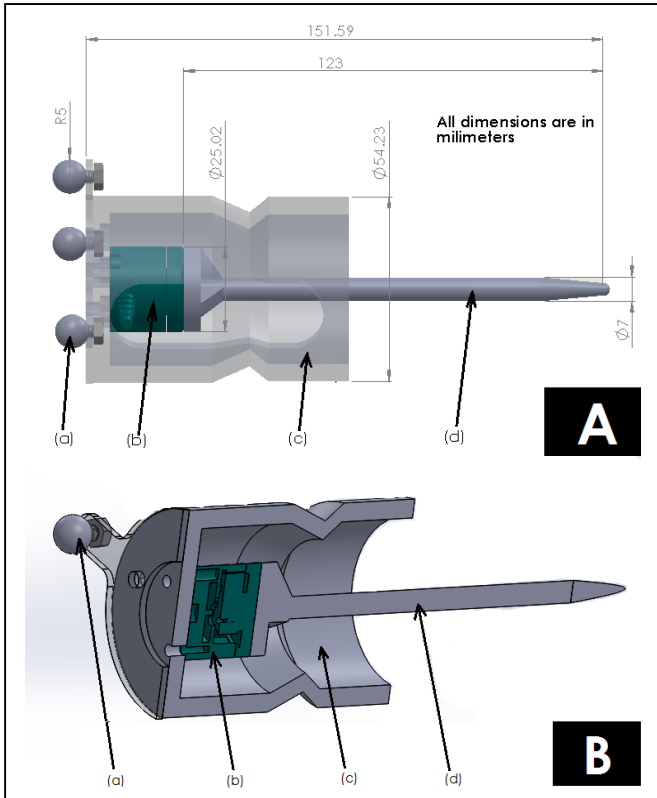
(A) CAD model of handheld stiffness measuring device. (B) Cross sectional view of the handheld stiffness measuring device. (a) IR reflector markers to detect position of the device. (b) Force-torque sensor. (c) 3D printed container. (d) 3D printed Indentation probe.
